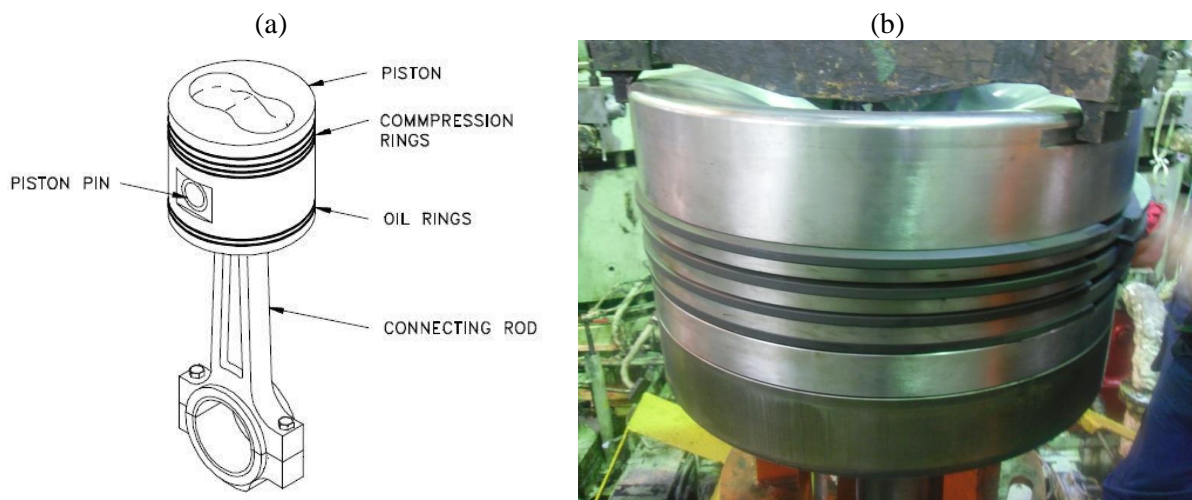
(a) Piston and its components [13], (b) Piston and the piston rings of M/V Despoina.
